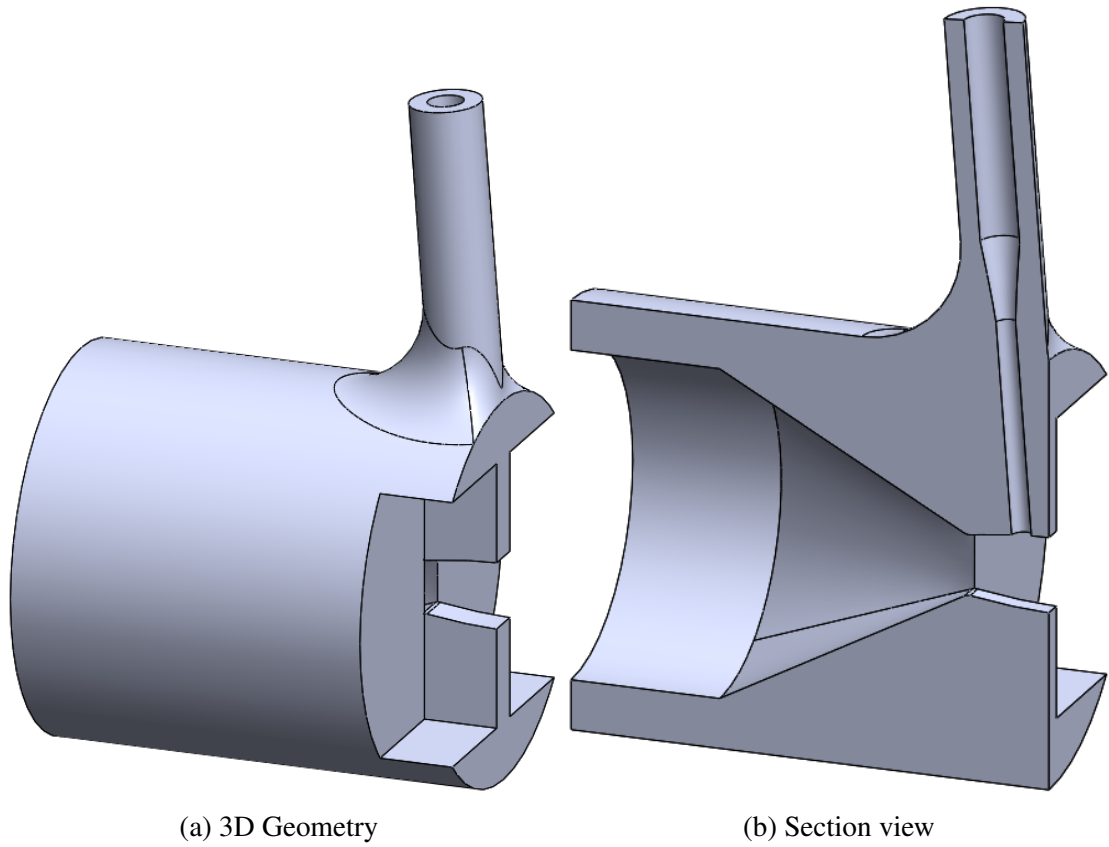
3D geometry with secondary injection for Mach 1.6
